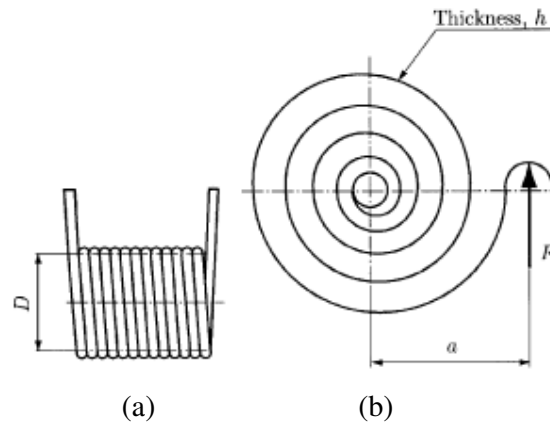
Torsion springs a)helical, and b)spiral [14]
